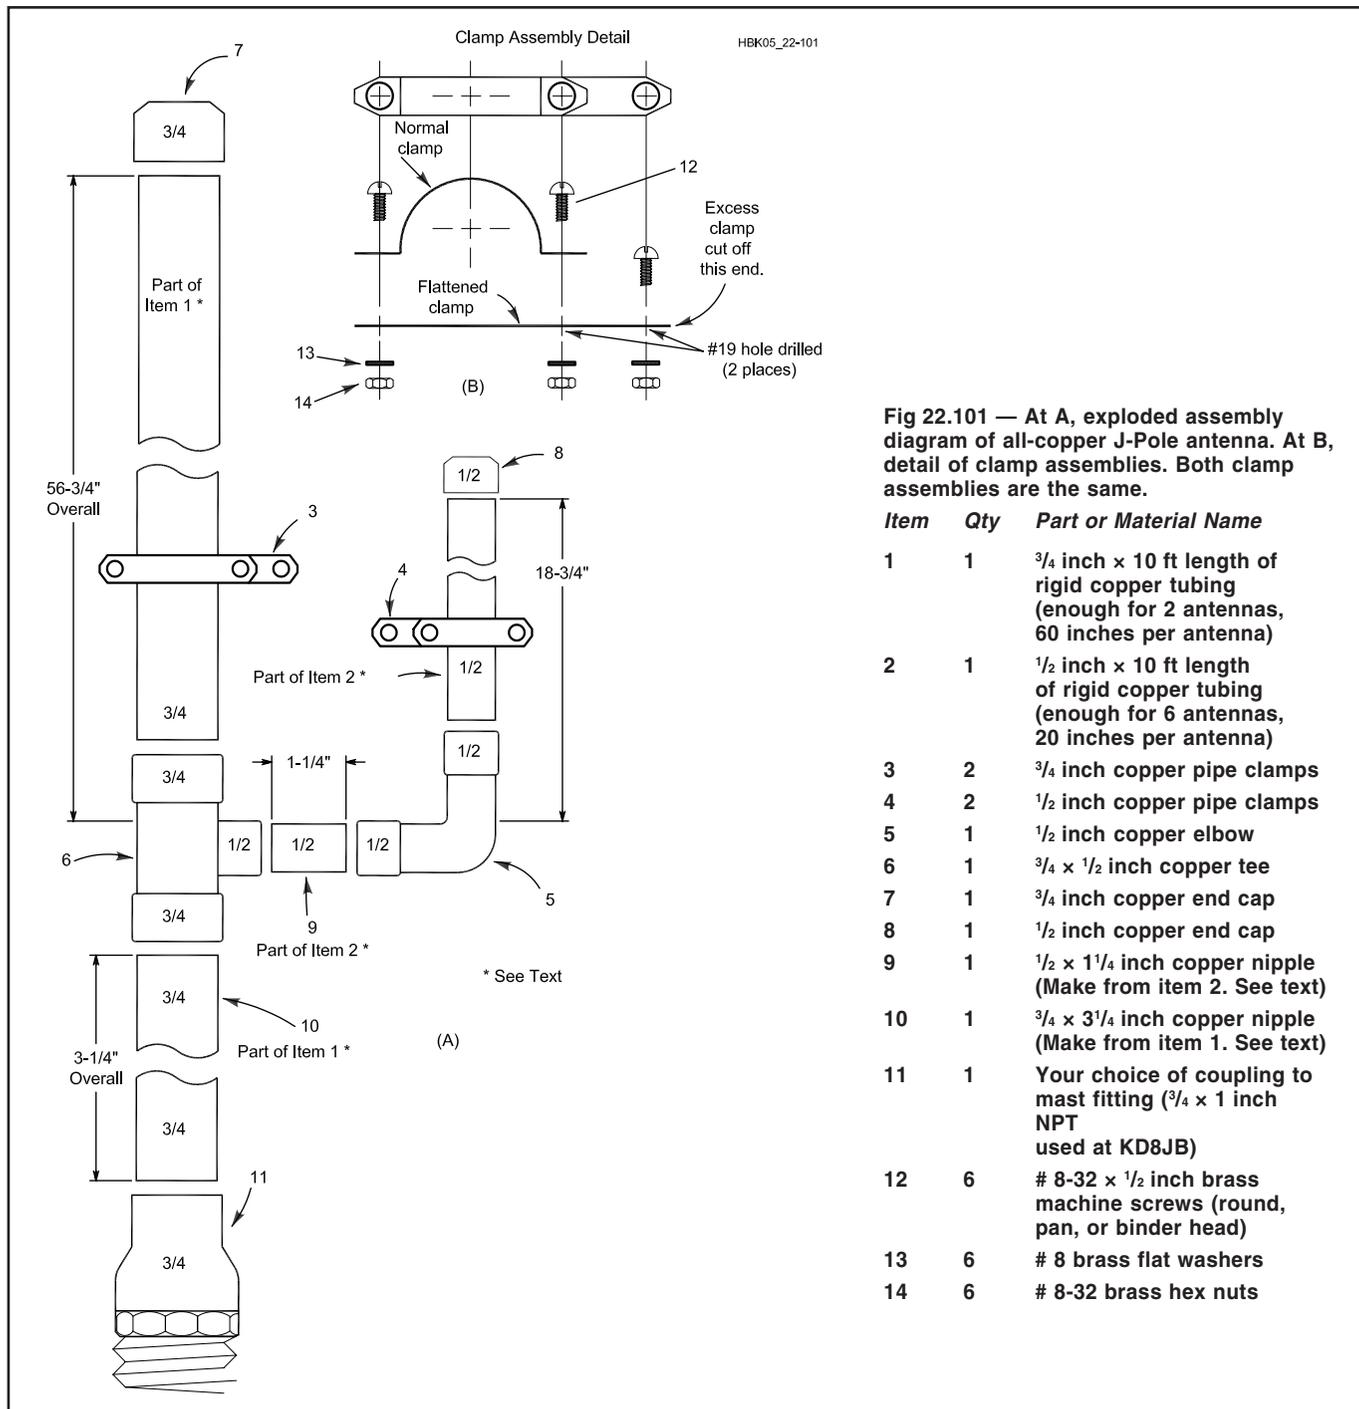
At A, exploded assembly diagram of all-copper J-Pole antenna. At B, detail of clamp assemblies. Both clamp assemblies are the same.
